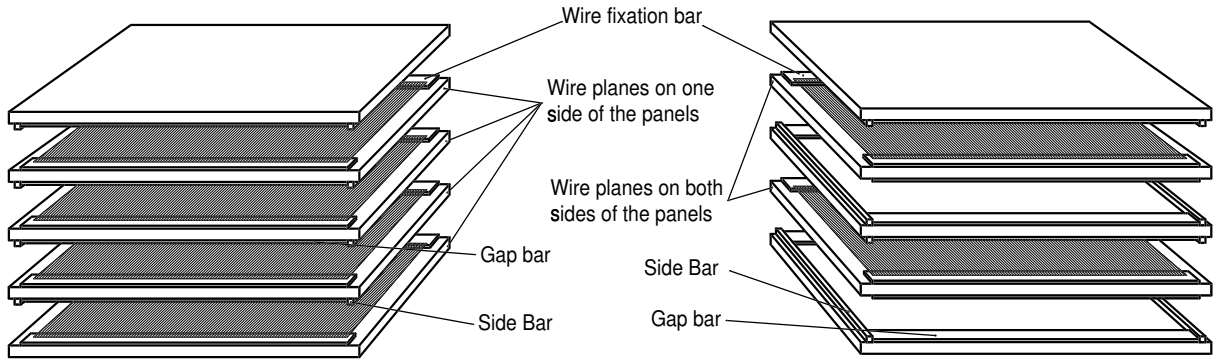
Exploded view of chambers ready to be assembled. The left side shows panels with single sided wires and the right side panels with wires on both sides. The position of the various bars is indicated as well.
